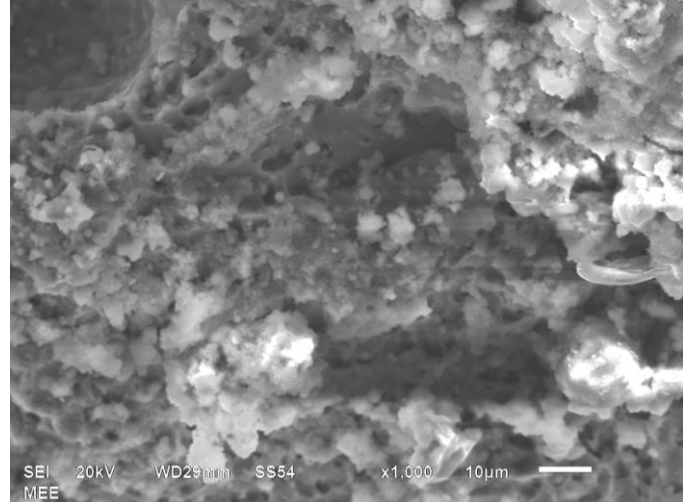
1000X Sample 1, Corrosion and Ductile Rupture near Weld Root
